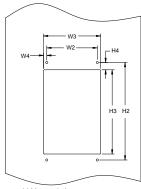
Flange mounting diagram for 380V 1.5-75kW models
